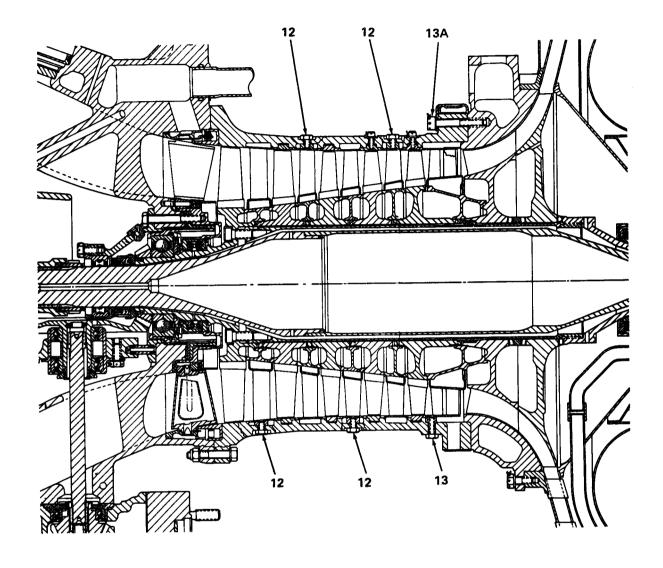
Special Torque Value Locations (T53-L-13B/703 Engines) (Sheet 2 of 5)
